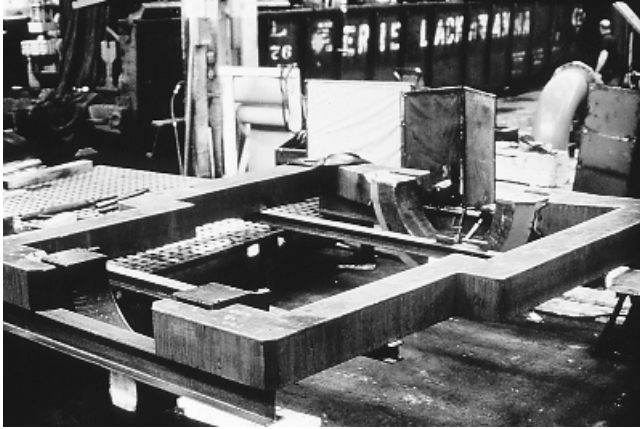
Flange production from a thick plate. (*Dresser-Rand Company, Olean, N.Y.*)
